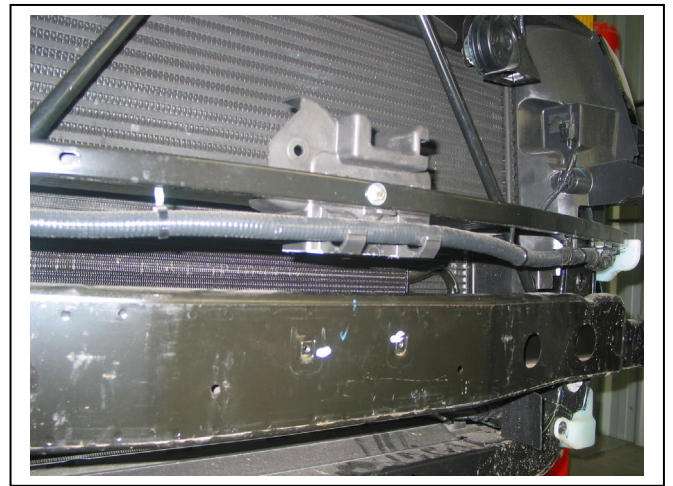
Hole drilled in grille locator and M6 x 35 bolt fitted.
